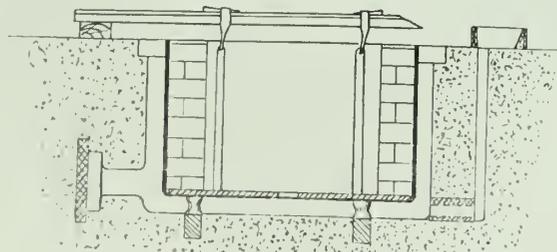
ASSEMBLED SAND MOULD WITH LOAM CORE.
